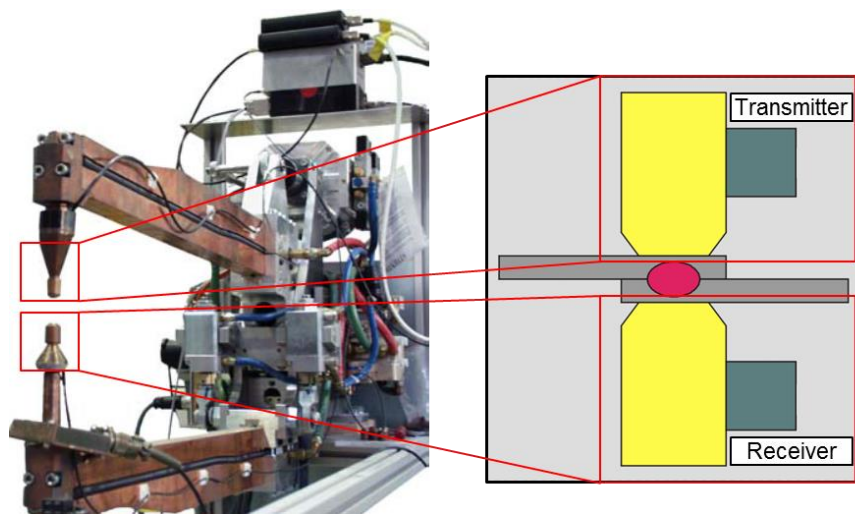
Ultrasonic Weld Monitor (USWM) in resistance spot welding.
